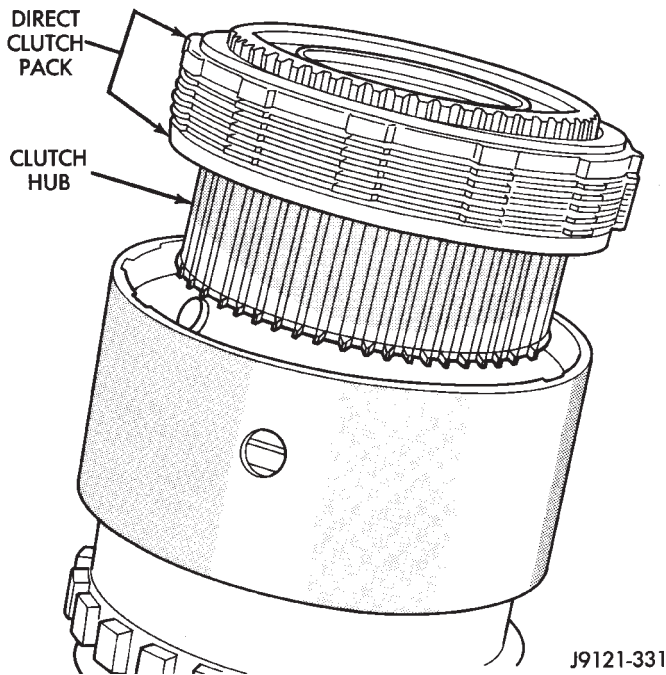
Installing Assembled Direct Clutch Pack And Hub
